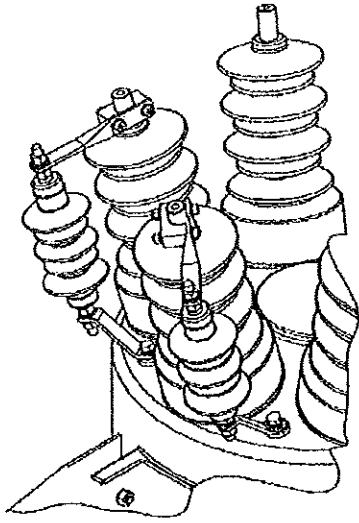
Shows an arrangement when a connection to the recloser bushing is required.
